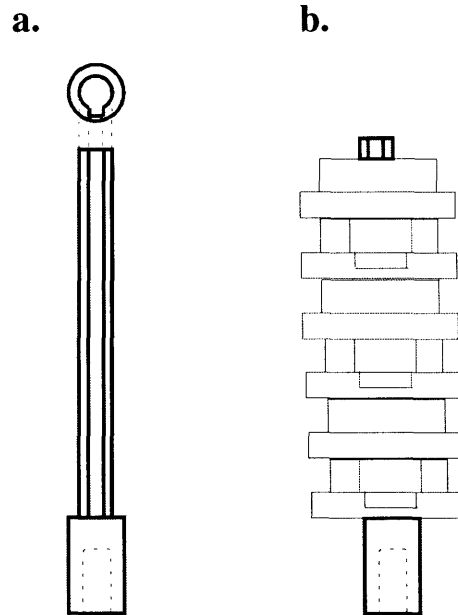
a. Rotor shaft; b. Shaft w/ six stacked rotor stages
